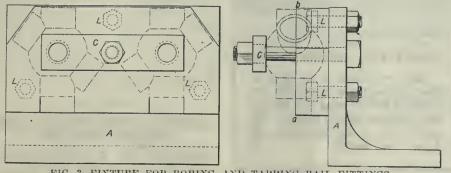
FINTURE FOR BORING AND TAPPING RAIL FITTINGS.
